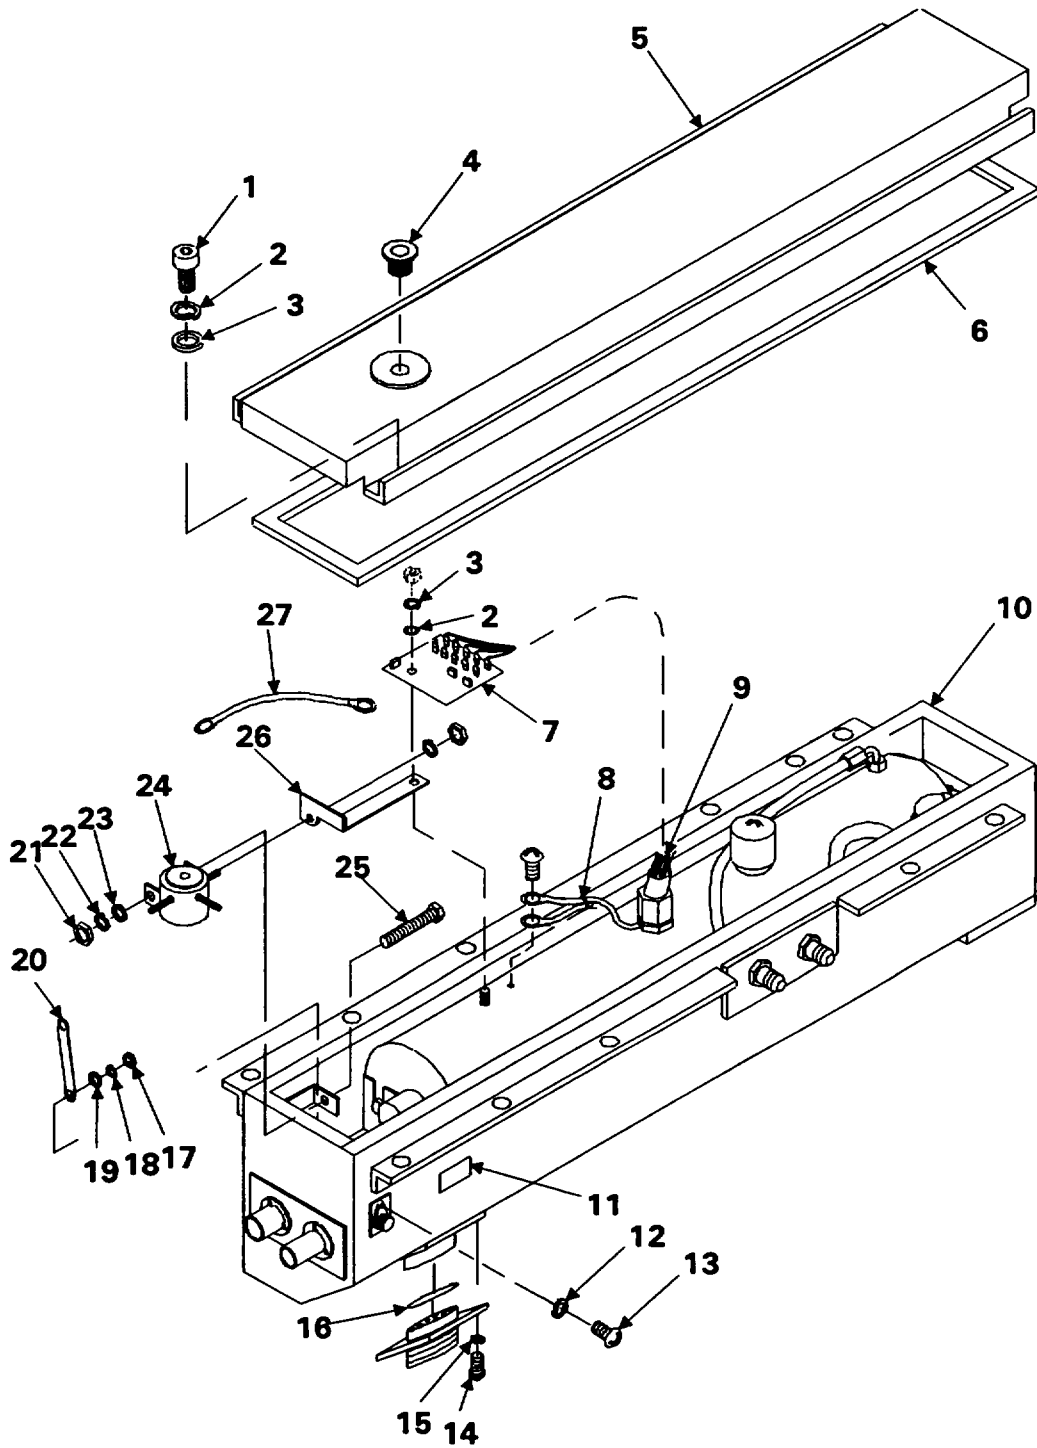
Hydraulic Unit Assembly 9375758 (Sheet 1 of 2)
